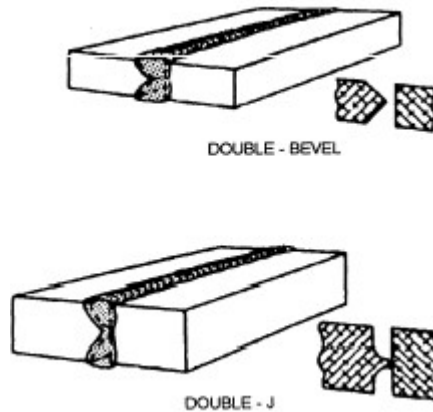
Butt Weld Joints Test Coupon
